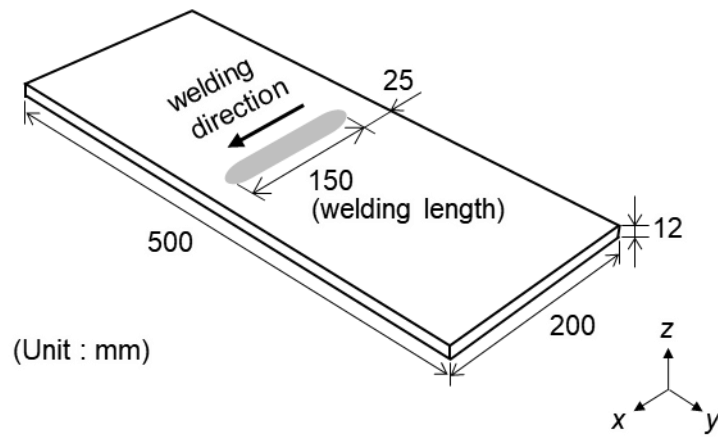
Configuration of bead-on-plate welded joint.
